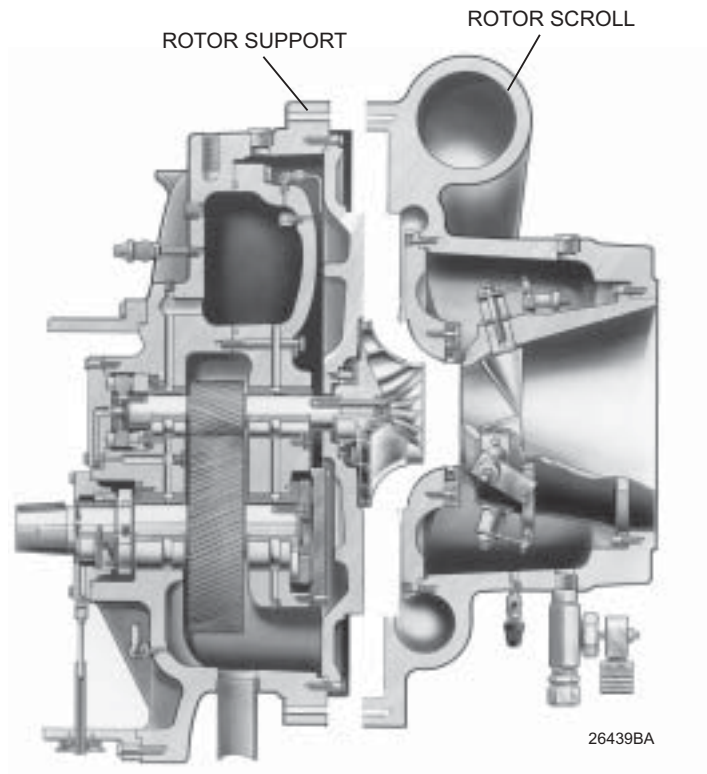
DISASSEMBLY OF ROTOR SUPPORT FROM THE ROTOR SCROLL
